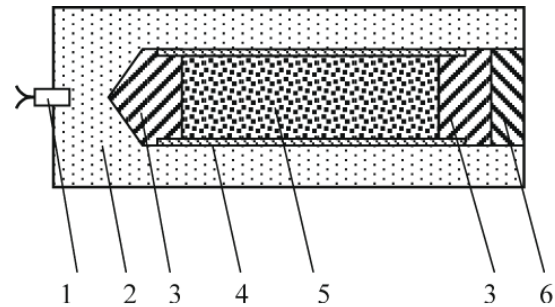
Scheme of explosive compaction: 1 – detonator, 2 – explosive charge, 3 – steel plugs, 4 – container (steel tube 12 mm in diameter), 5 – copper powder, 6 – momentum trap.
